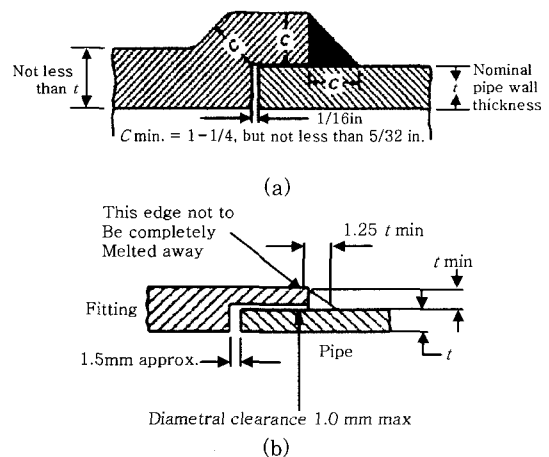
Standards on the socket weld joint. (a) ASME B31.8 (B) BS 2633
